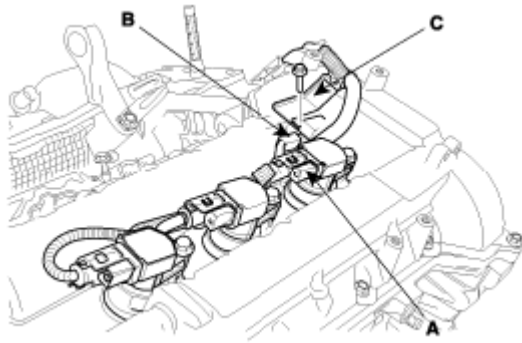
Identifying RH Ignition Coil Connector, Condenser Connector And Wiring Bracket
